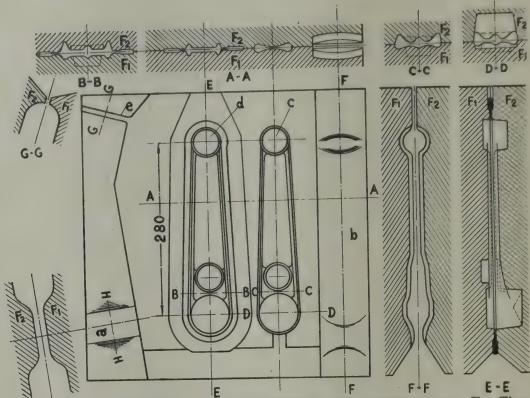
Typical example of multi-impression drop forging die: F<sub>1</sub>—The Lower Die; F<sub>2</sub>—The Top Die. (In all drawings illustrating drop forging dies, the plan represents the lower die): (a) Fuller, (b) Edger, (c) Blocking impression, (d) Finishing impression and (e) Cut-off
